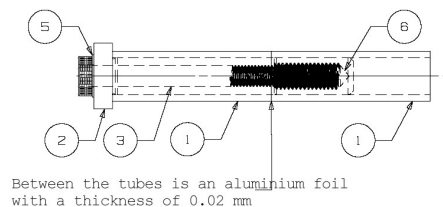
Test specimen 5 with 1: SiC tubes sawed with aluminium foil of 20 μm between them, 2: aluminium end, 3: 8 mm. threaded end, 5: 8 mm. nut
